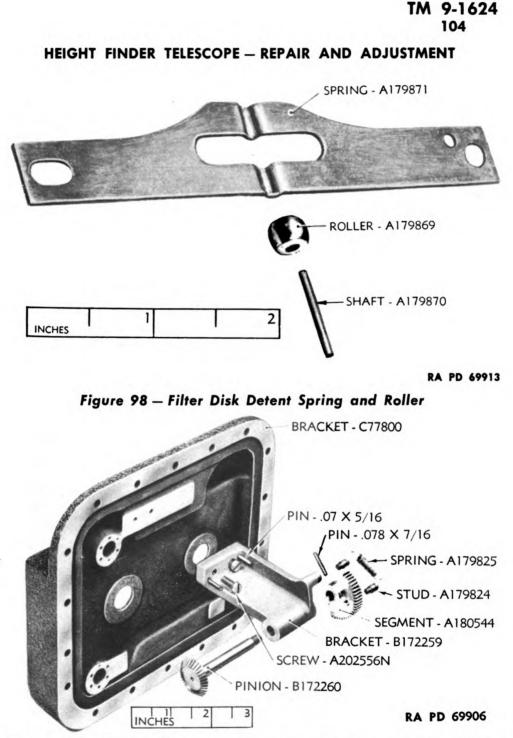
Change-of-magnification Gear Bracket - Exploded View
